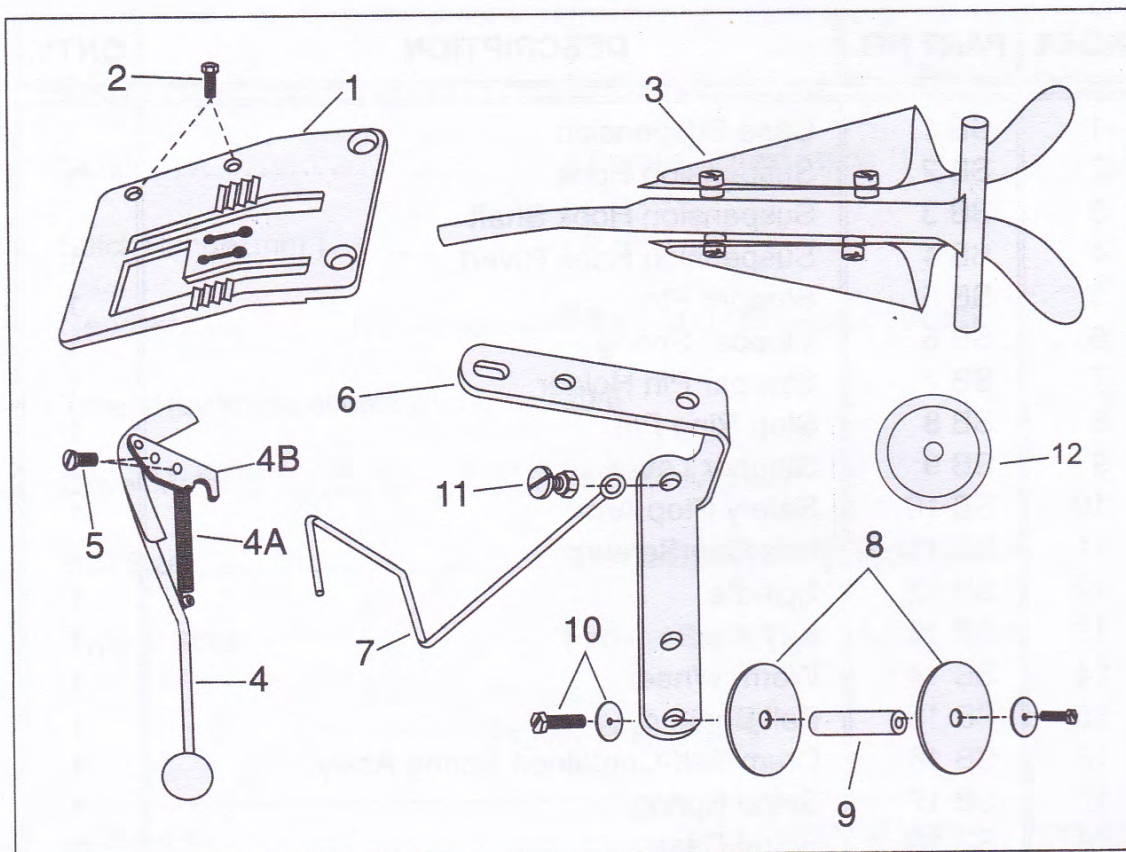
PLATE H - SPARE PARTS FOR TAPE BINDING ATTACHMENT
